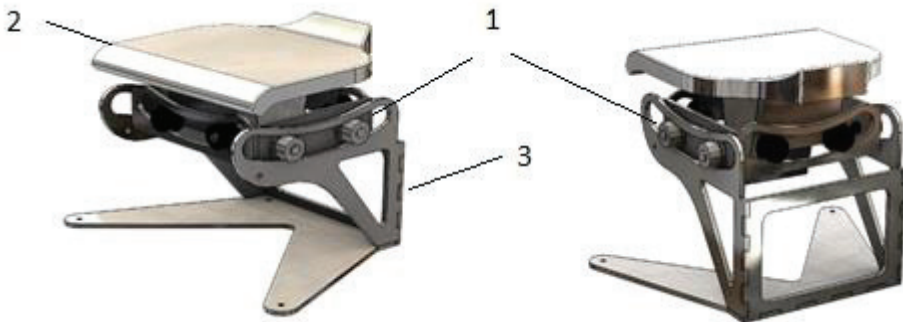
Prototype of unstable seat: 1 – small bearings, 2 – seat, 3 – frame
